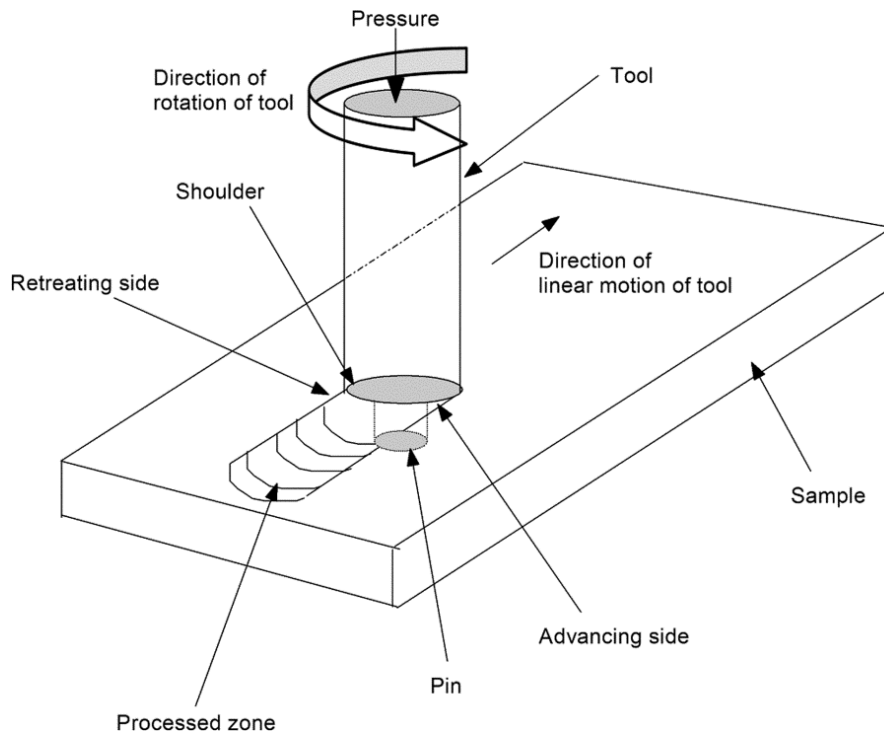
Schematic Illustration of Friction Stir Processing Technique
